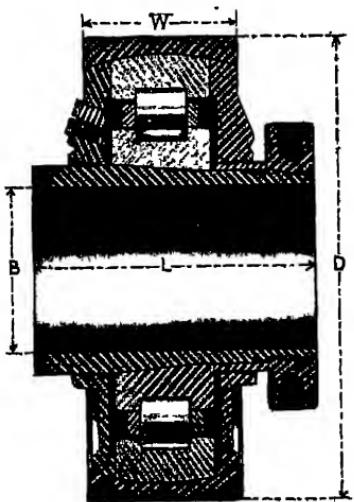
THE HOFFMANN SELF-ALIGNING ROLLER BEARING
